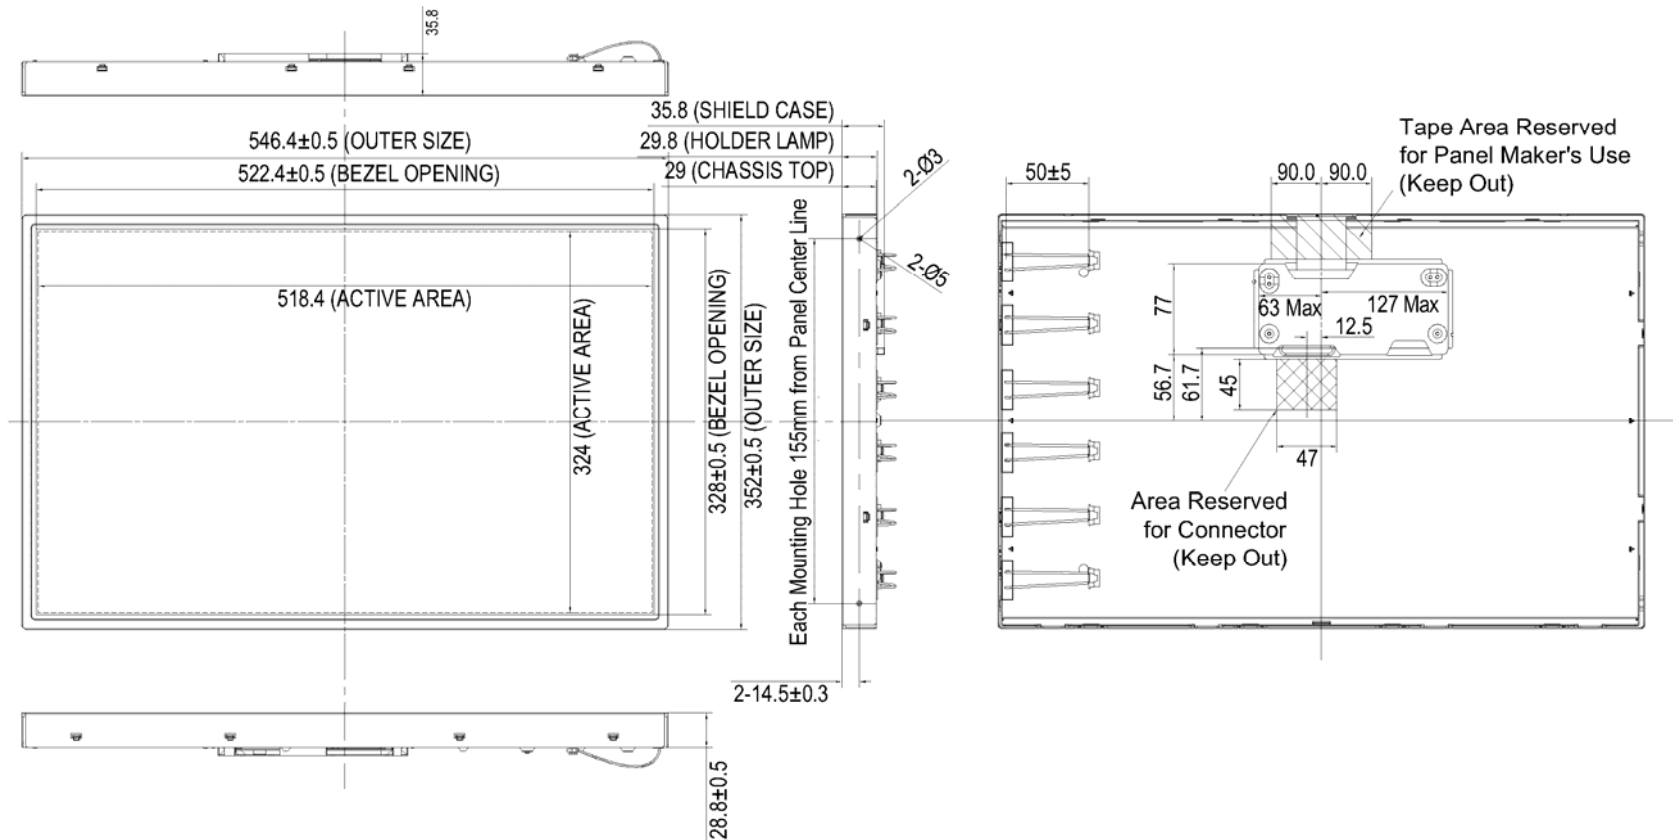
24-inch Standard Panel Mechanical Dimensions
